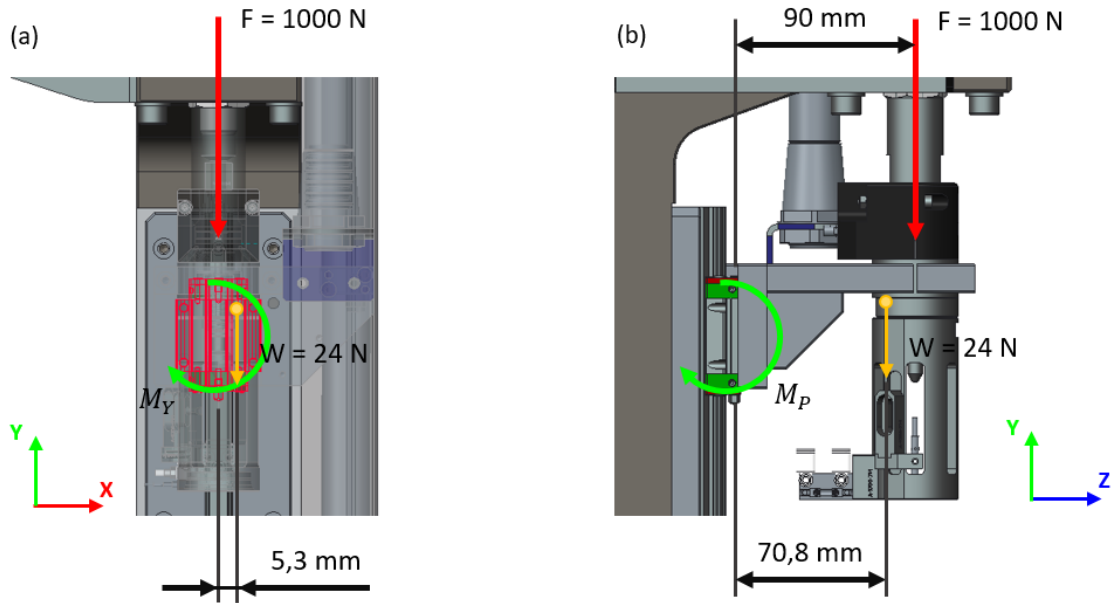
Free body diagram of the press tool linear guide: a) Front view; b) Left view;
